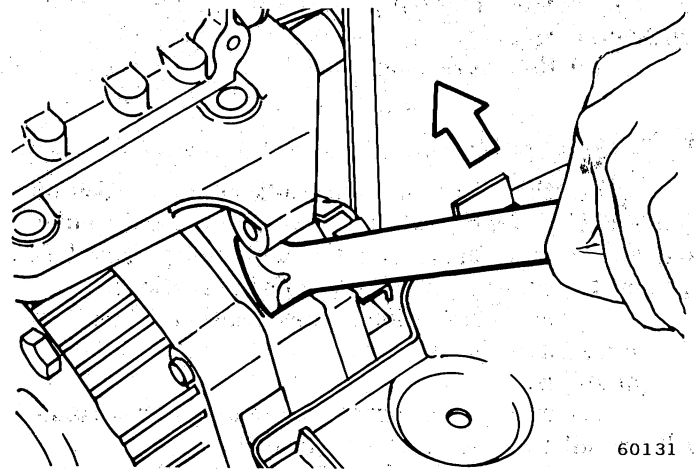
C-19 Six-Cylinder Engine (w/o A/C) Alternator Drive Belt Adjustment
